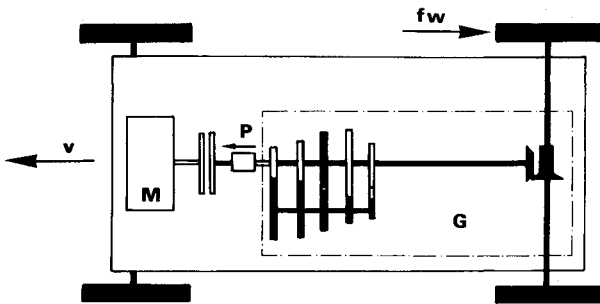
Drive assembly (schematic, M: motor, G: gear).
